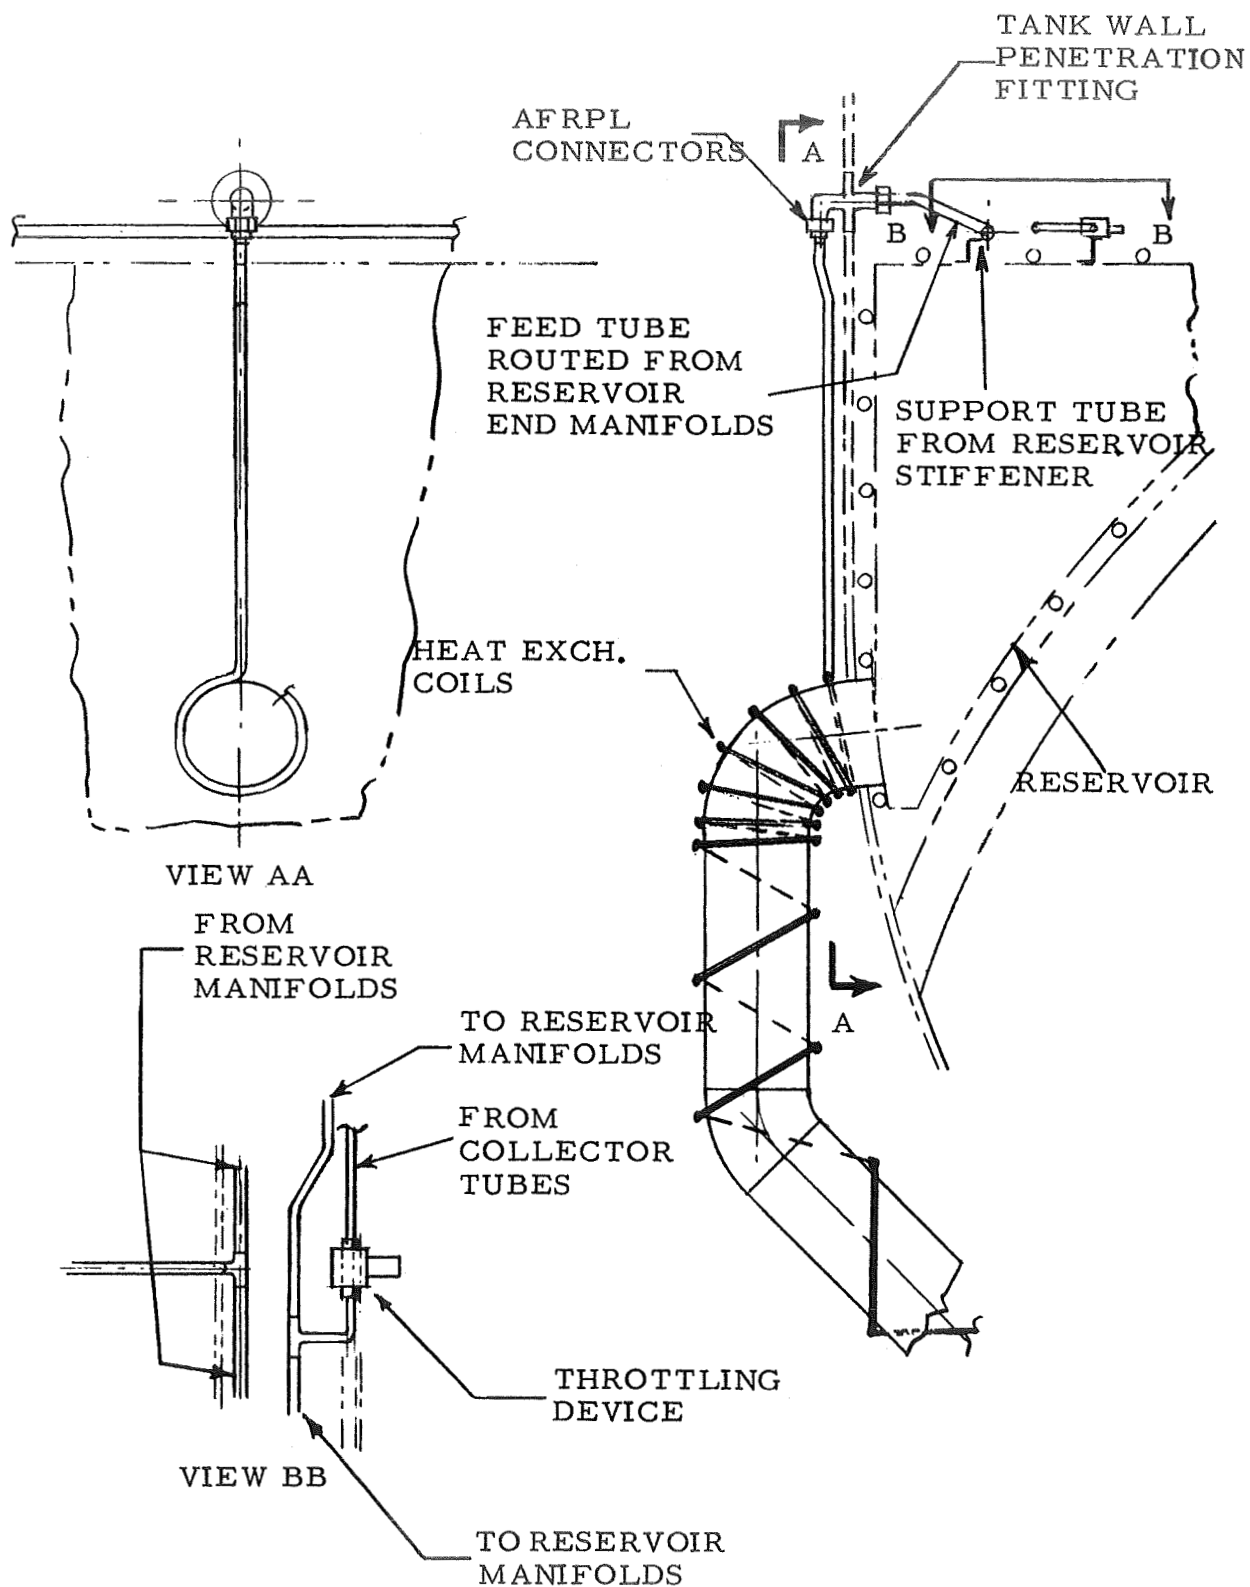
Plumbing Arrangement From Reservoir to Outlet Duct Heat Exchangers
